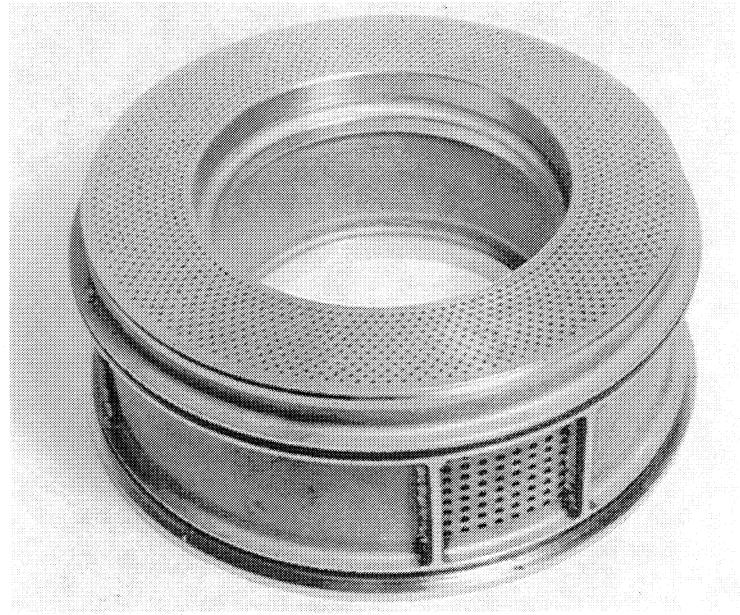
Completed SPDE Cooler Ready for Installation into Heater Head Assembly
